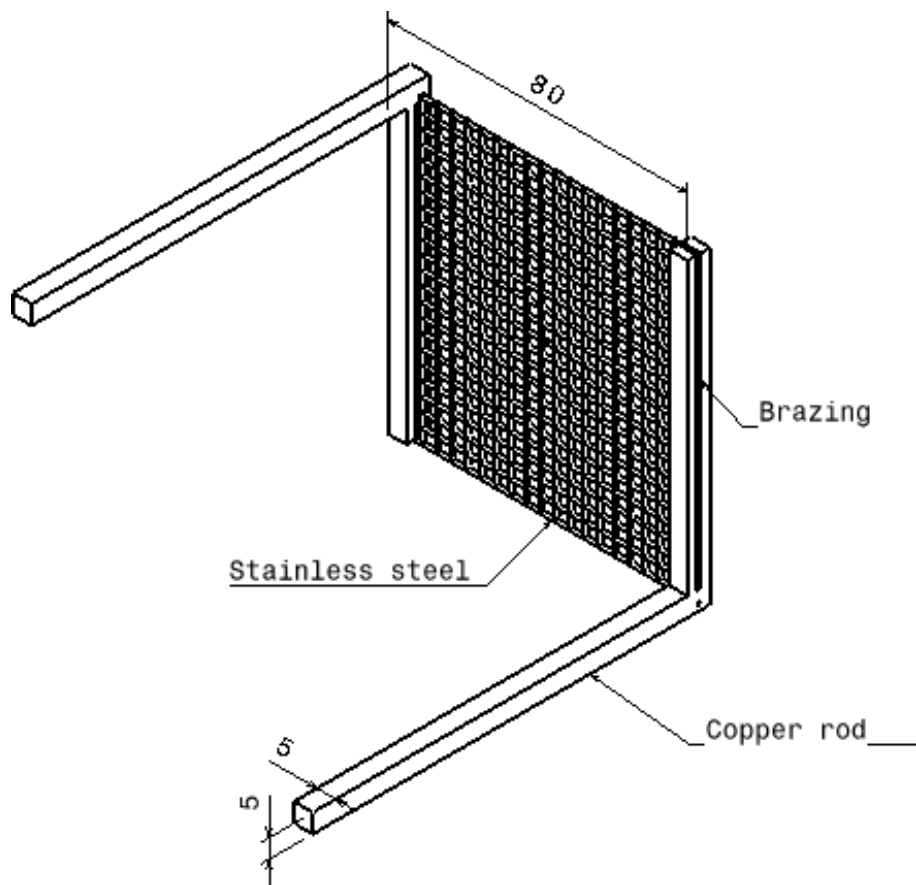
Detailed drawing for the heater mesh brazed with the copper rod. All dimensions are in *mm*.
